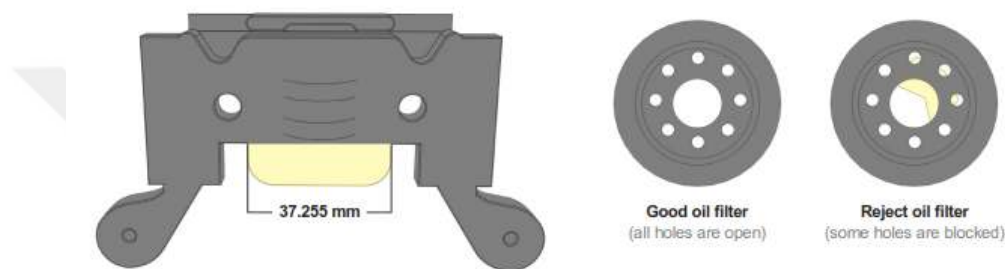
Real-time measurements and inspections like a machined bracket (left) or oil filters (right)
